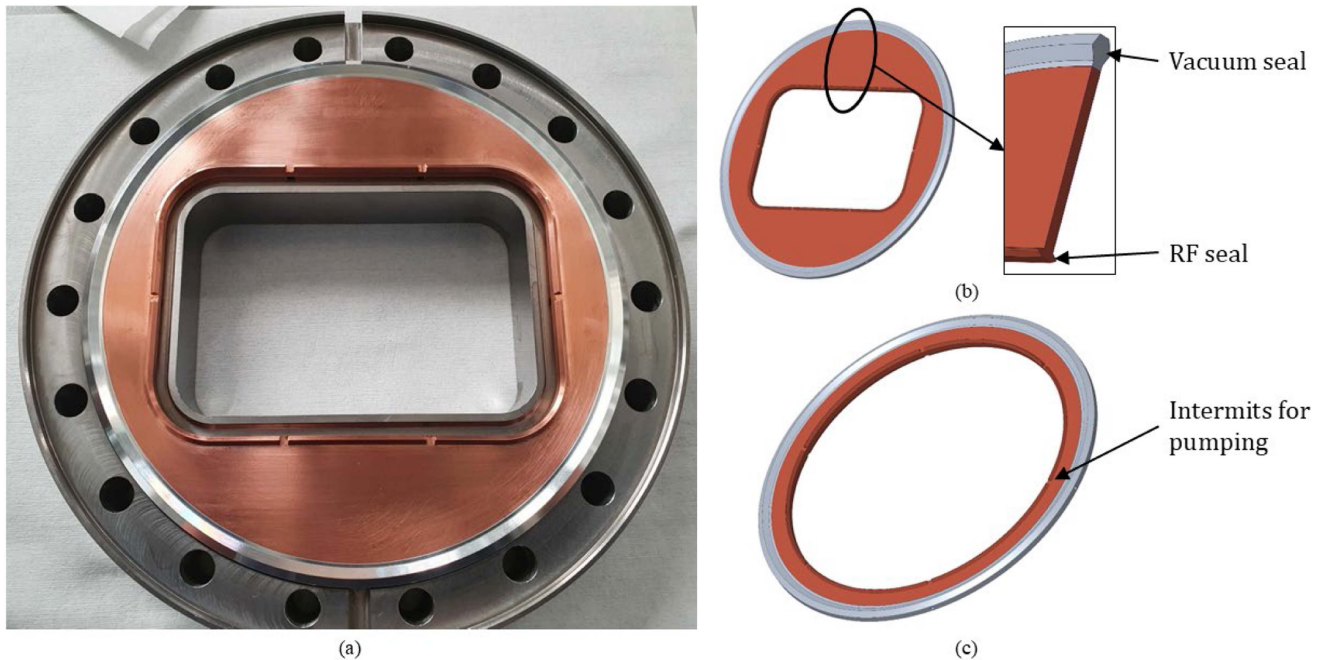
Gaskets developed for NbTi55 flanges. (a) Waveguide flange prototype with gasket for cold testing. Same gasket design for (b) waveguide and (c) beam pipe flanges with separated RF and vacuum sealing, RF sealing intermitted for vacuum pumping whilst preventing creation of resonating pill-box cavities.
